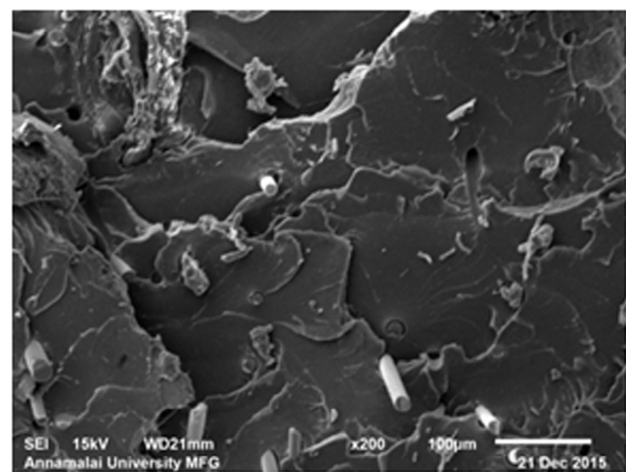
Fracture surface of impact specimen PBaSi-3
